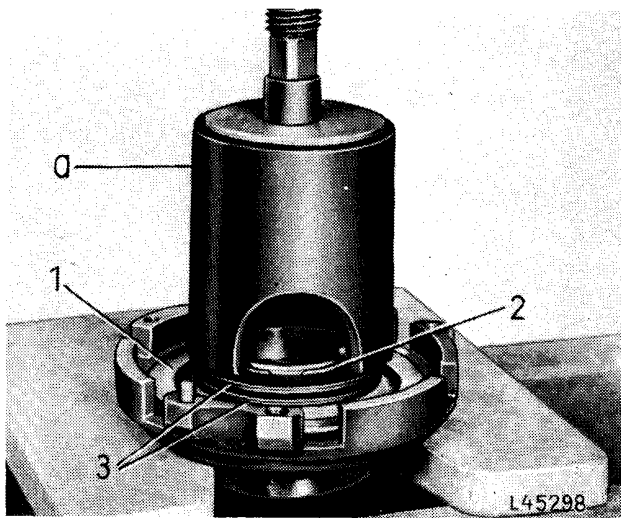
Removing Annular Piston of HIGH Disk Clutch
